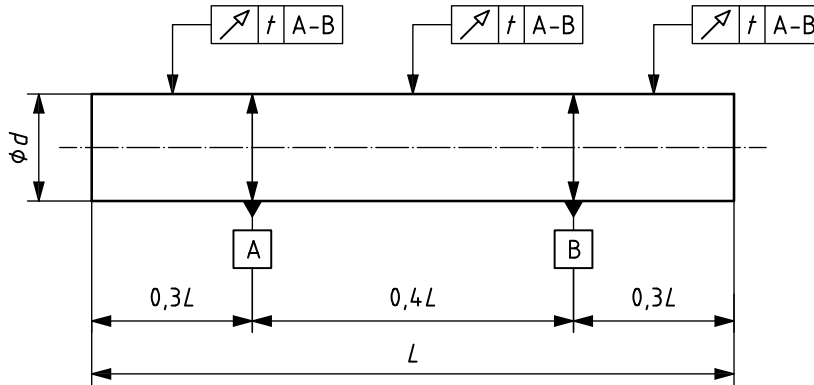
Solid and tubular shafts for series 1 and 3 sleeve type linear ball bearings
